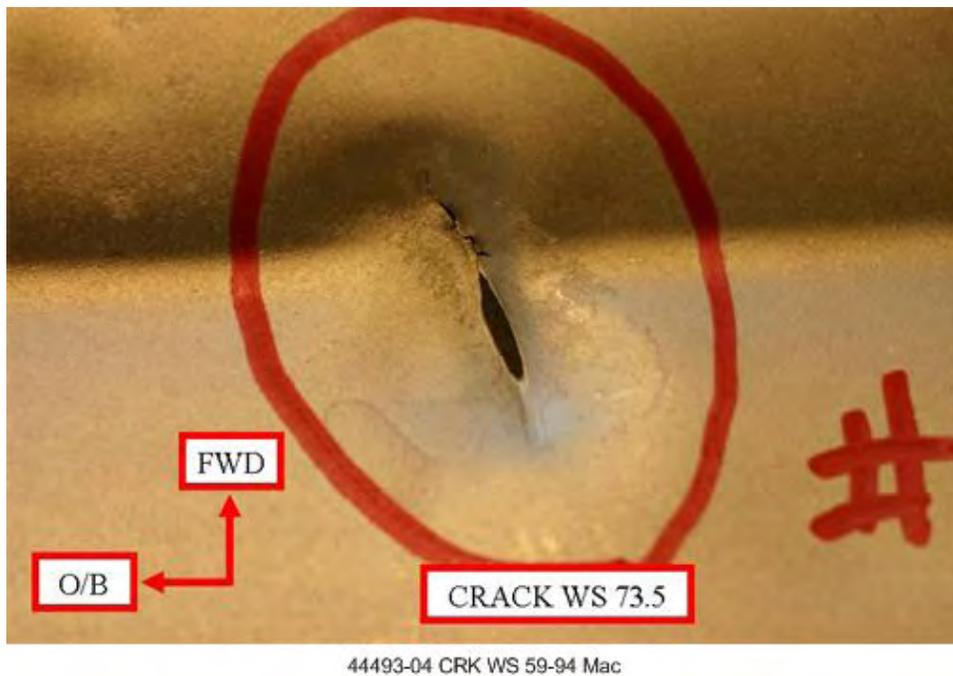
Macroscopic View of Crack on the Left Nacelle Front Locker Floor WS 73.5
